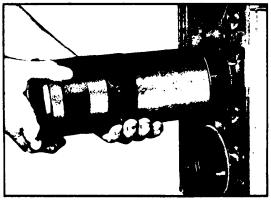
Installing Piston, Connecting Rod and Liner Assembly in Cylinder Block
